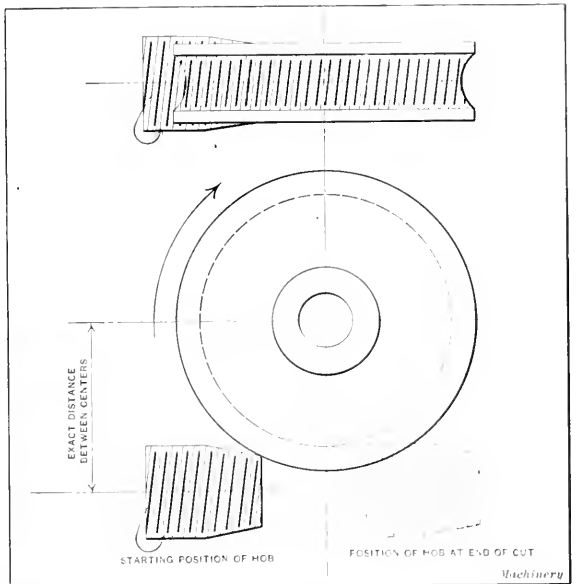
Diagram illustrating Manner in which Tapered Hob is presented to Worm-wheel Blank
